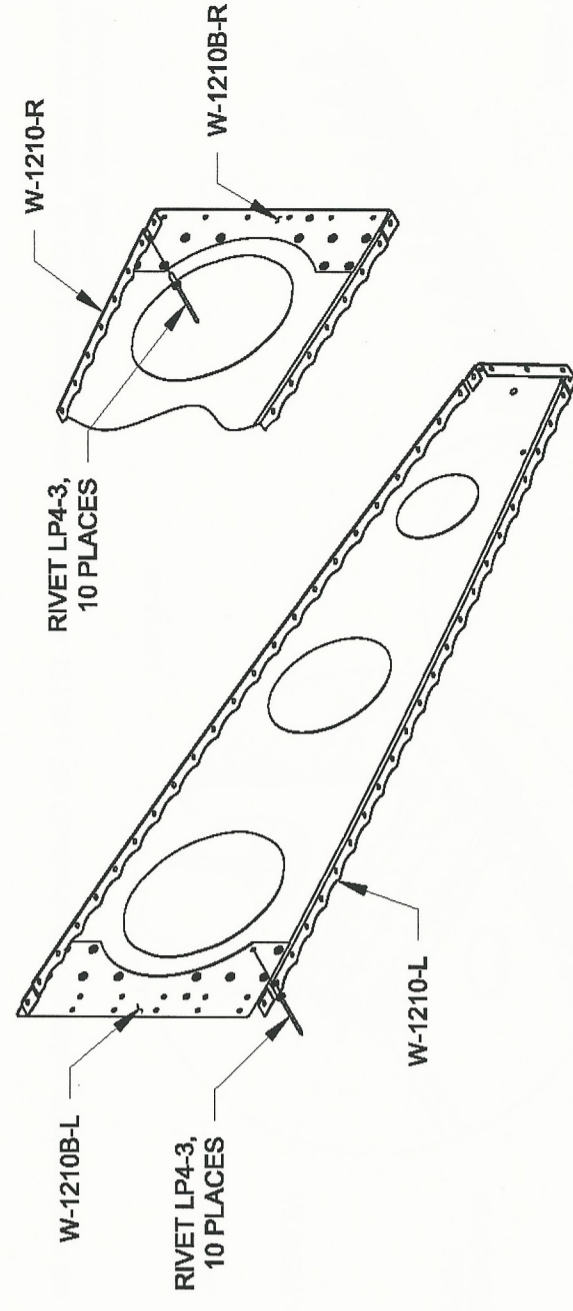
RIVETING THE RIB DOUBLERS TO THE MAIN RIBS
